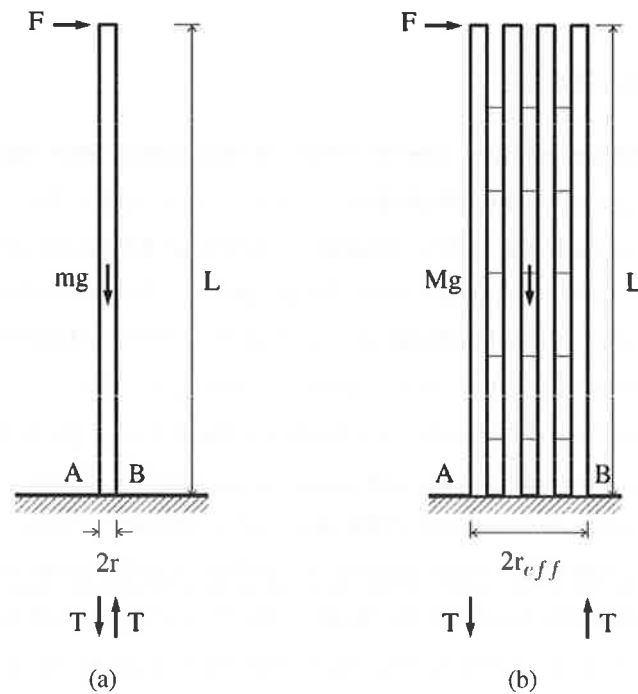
The forces acting on (a) a single slender tubular member and (b) an interconnected array of tubular members as the print head moves over the top of the part to deposit a new layer.
